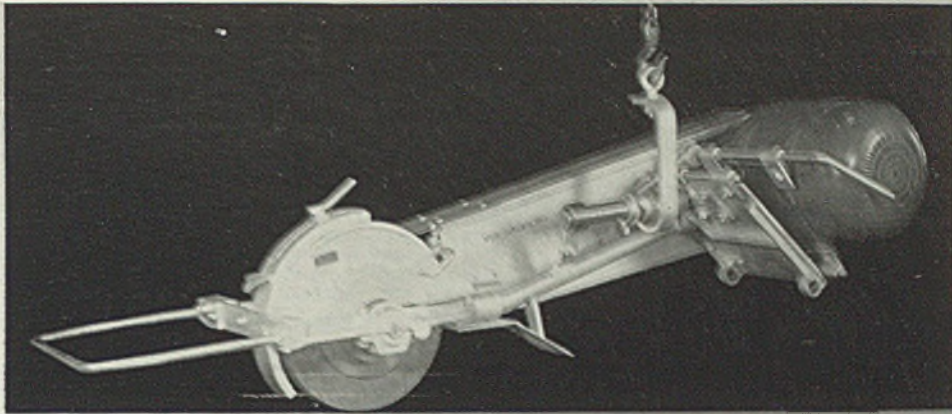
Illustration shows 20" rugged swing frame grinder for snagging. Note extra heavy grinding wheel guard and universal type suspension, eliminating all counterweight.
